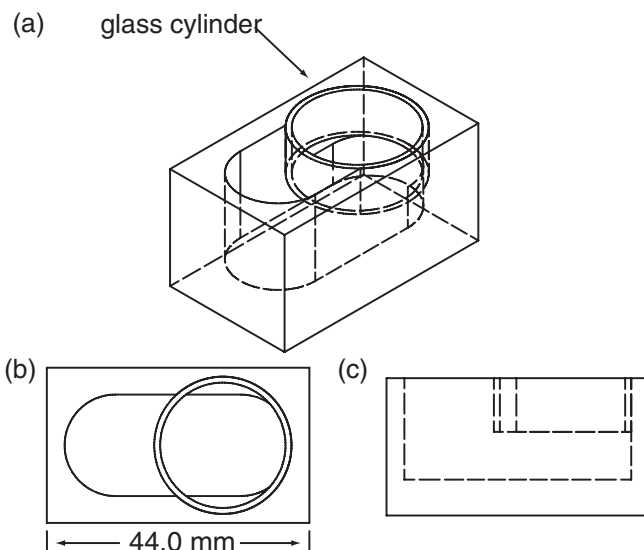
(a) Isometric view of the container with inserted glass cylinder to show the internal structure. (b) Top view drawing of the etching container with inserted glass cylinder. (c) Side view of the container.
